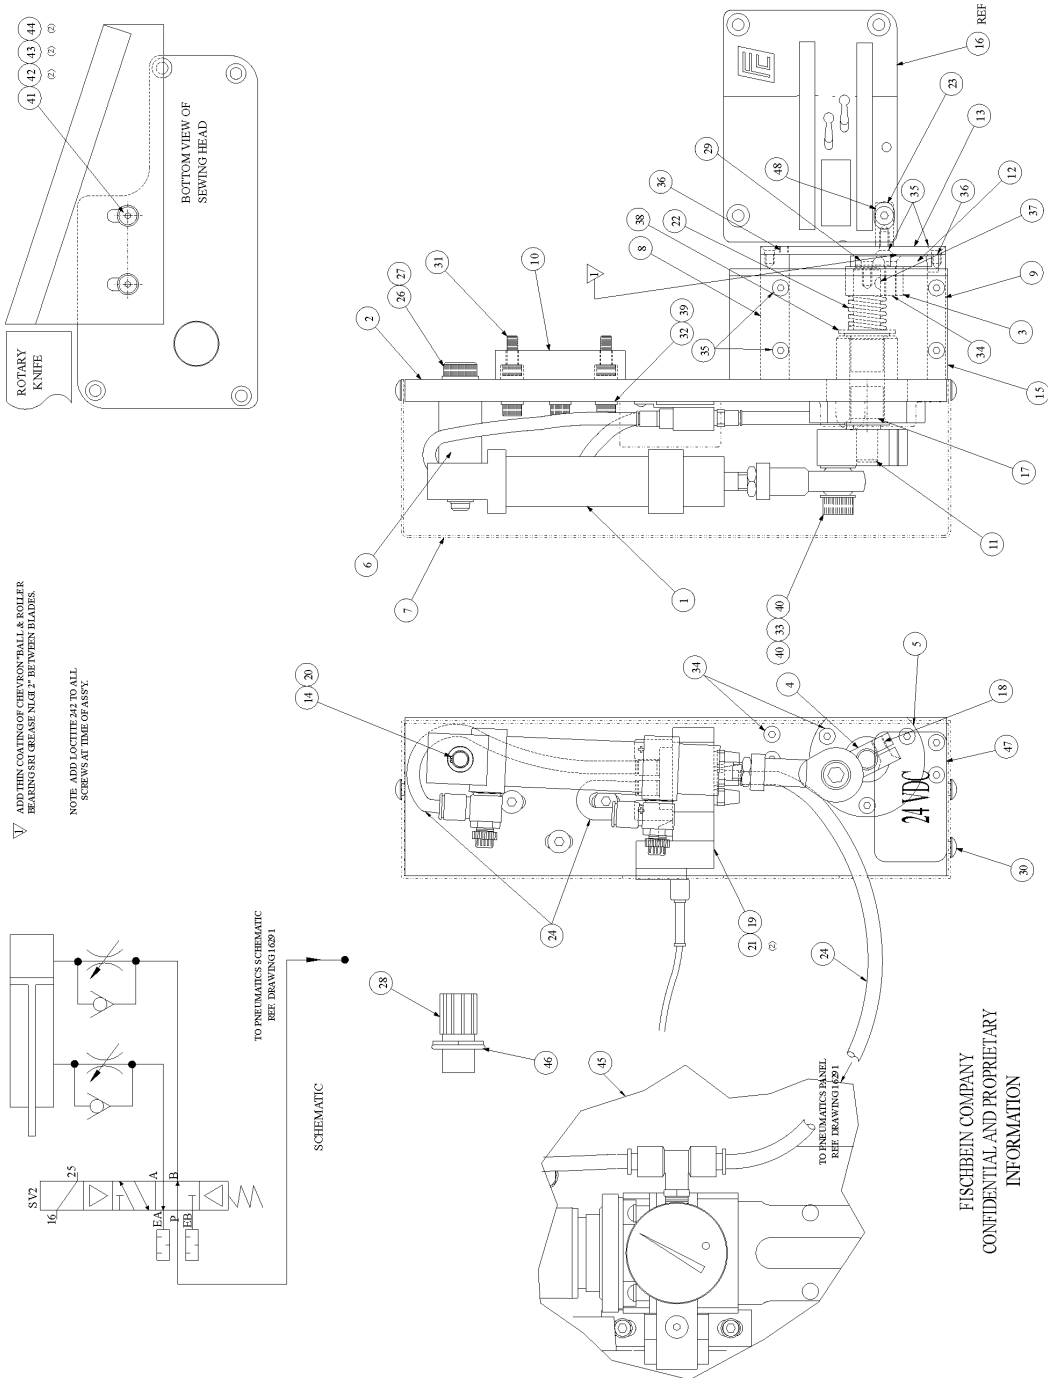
31275 Rotary Knife Assembly (24V)
